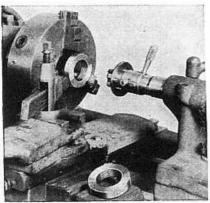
A 9-inch Lathe with Collapsible Tap for Threading
